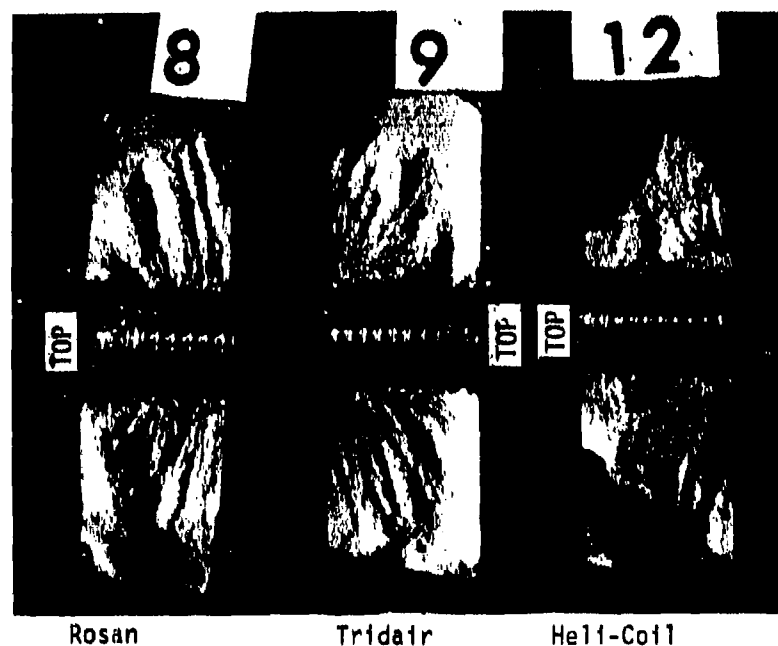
Close-up of Fatigue Failures of Specimens with Rosan, Tridair, and Hell-Coil 10-32 Size Insert. Inserts Installed by Manufacture. Torqued Bolts in Inserts During Tests.
